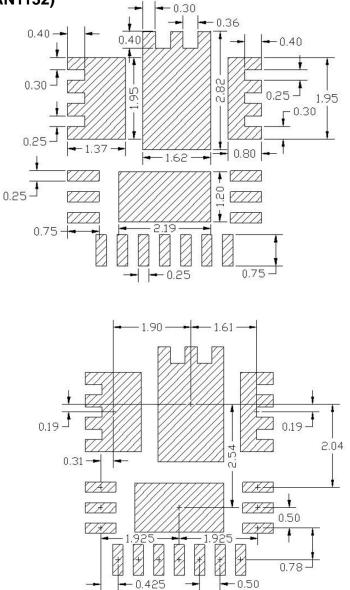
PCB Metal Pad Spacing (all dimensions in mm)
